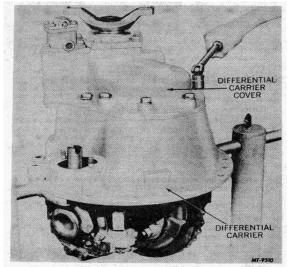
Differential Carrier and Power Divider Assembly Mounted in Rebuild Stand
